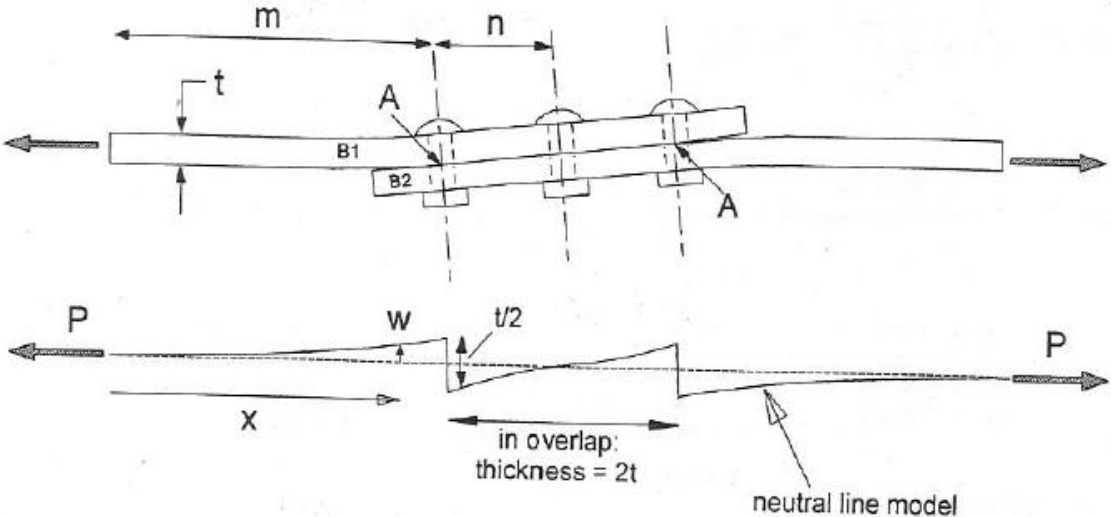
Secondary Bending in a Riveted Lap Joint Under Tensile Loading [13]
